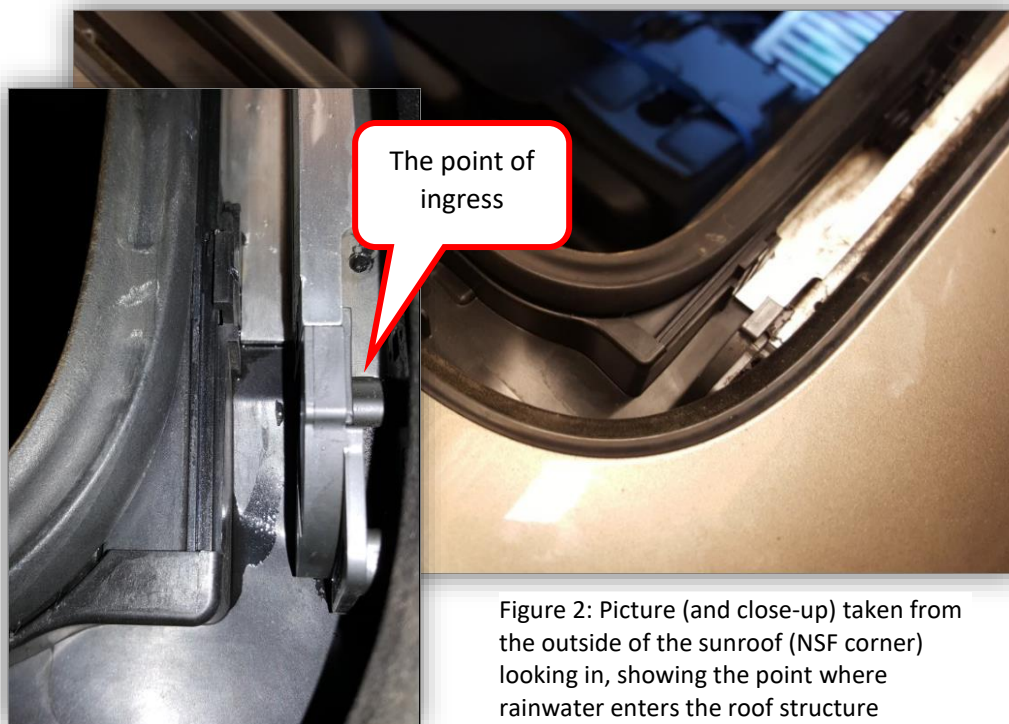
Picture (and close-up) taken from the outside of the sunroof (NSF corner) looking in, showing the point where rainwater enters the roof structure
